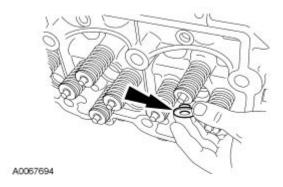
Removing Valve Spring Rotator Courtesy of FORD MOTOR CO.
